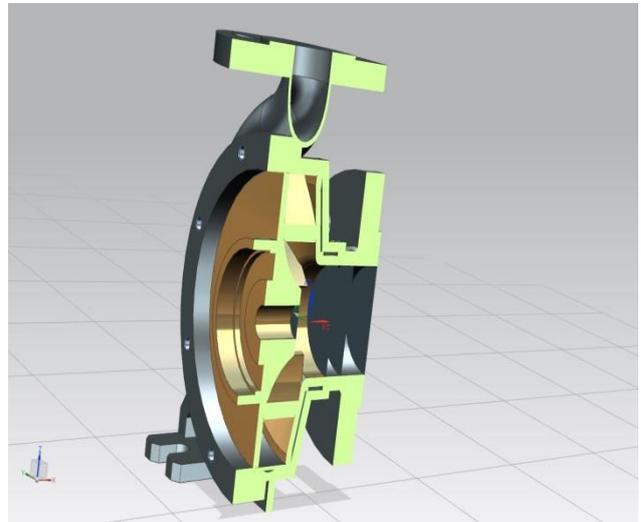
Assembled NX CAD models (section viewing), volute casing and impeller
